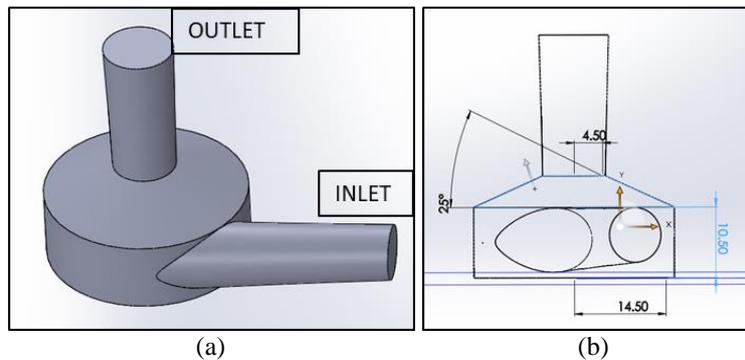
Spiral inducing chamber: (a) 3D view, (b) Geometrical dimension
